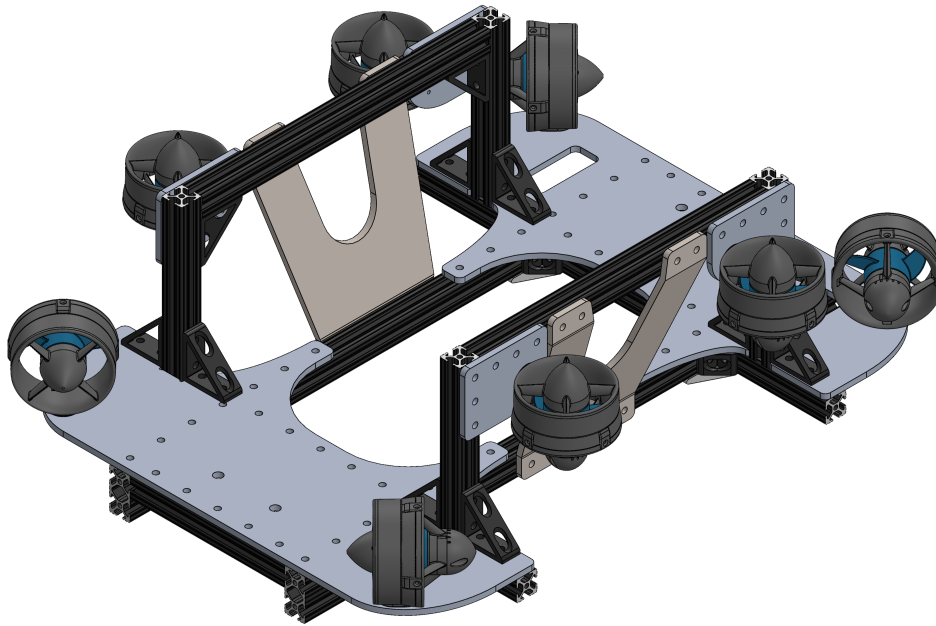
CAD model of the frame assembly using 80/20 extrusions
